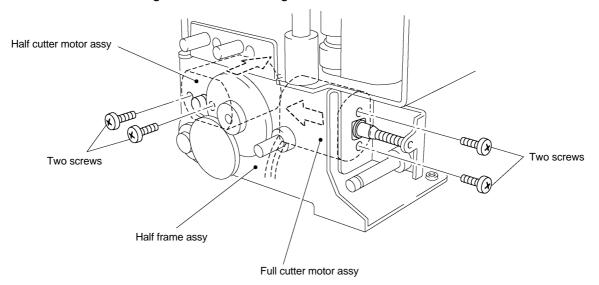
Removing the Half Cutter Motor Assy and the Full Cutter Motor Assy
